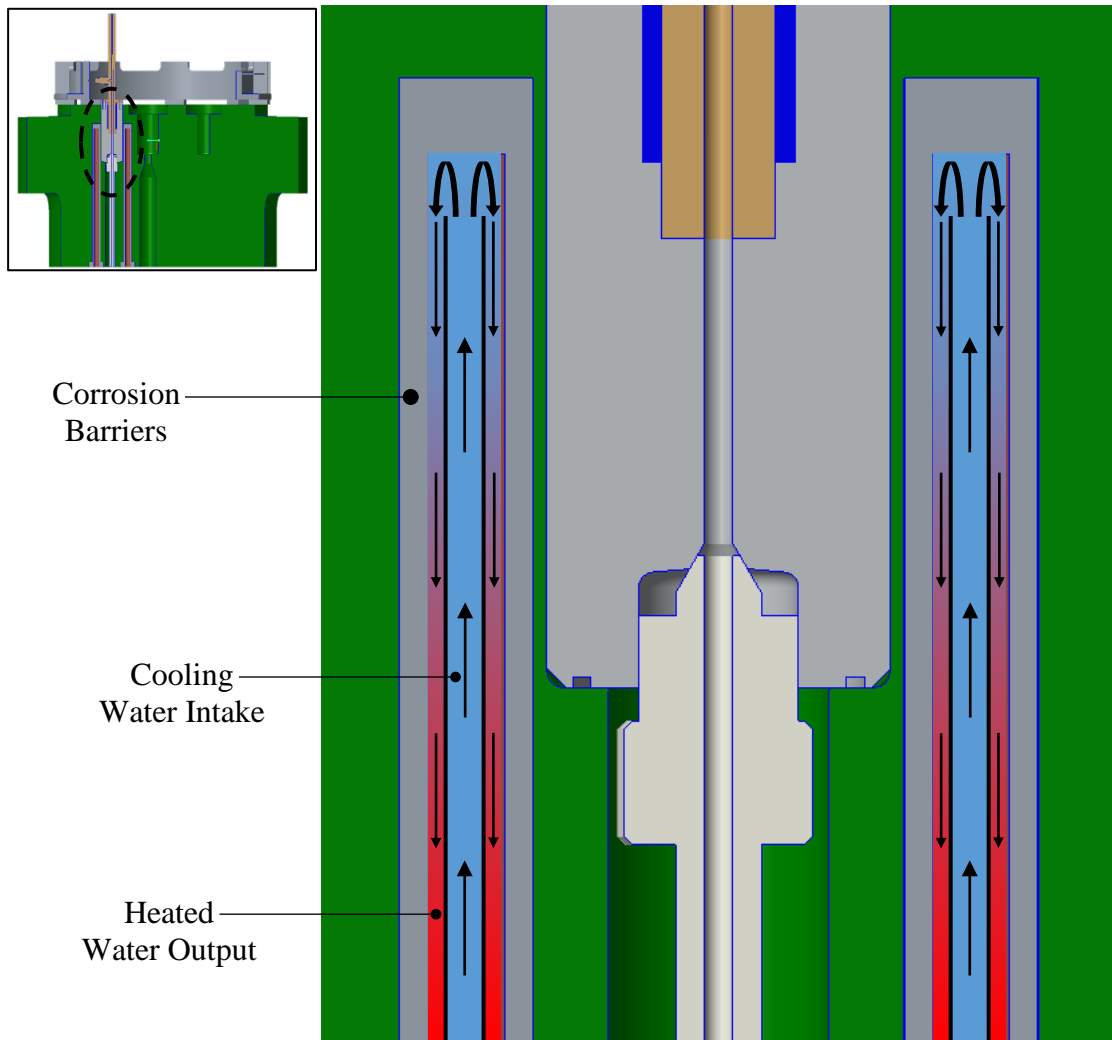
Bottom View of Closure Plug with Cooling System Setup
